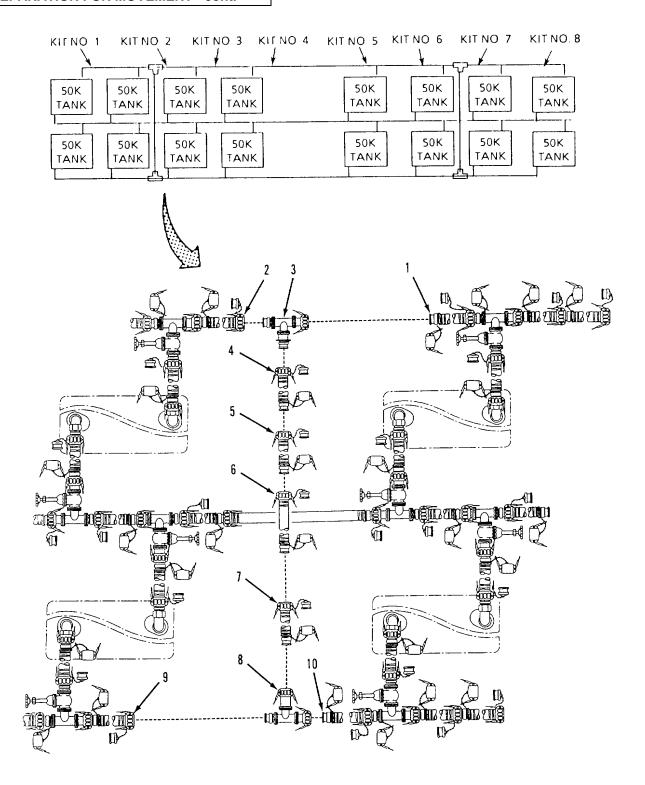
Interconnection Kit Disassembly (Sheet 1 of 2).
